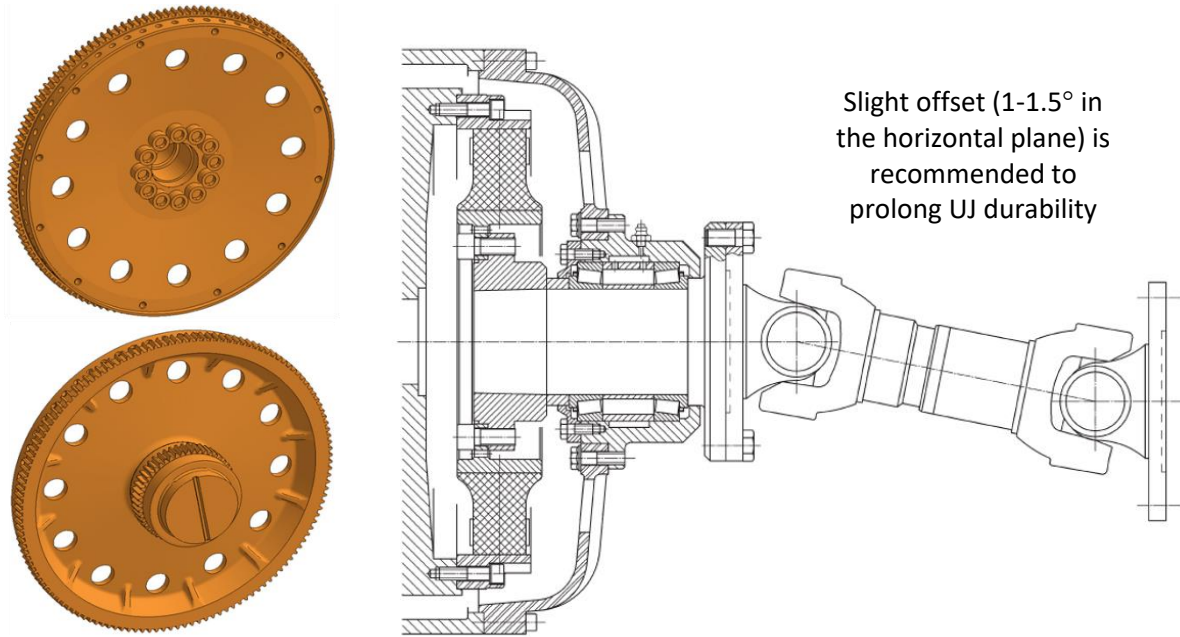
TEST BED FLYWHEEL DESIGN AND EXAMPLE PTO / FLYWHEEL / SHAFT ADAPTOR ARRANGEMENT
